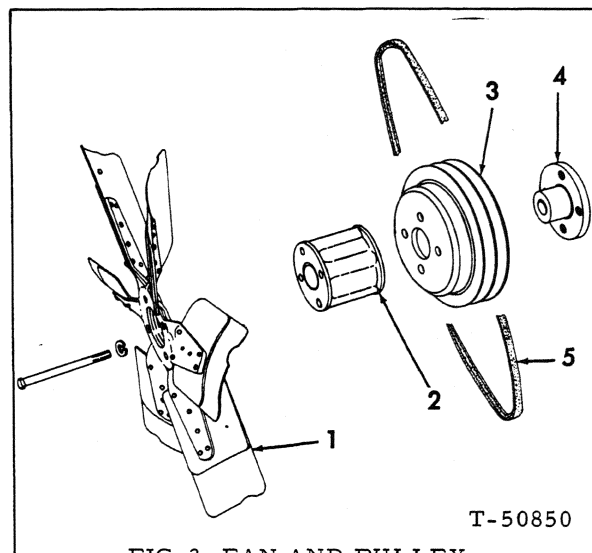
FAN AND PULLEY (WHEEL LOADERS)
